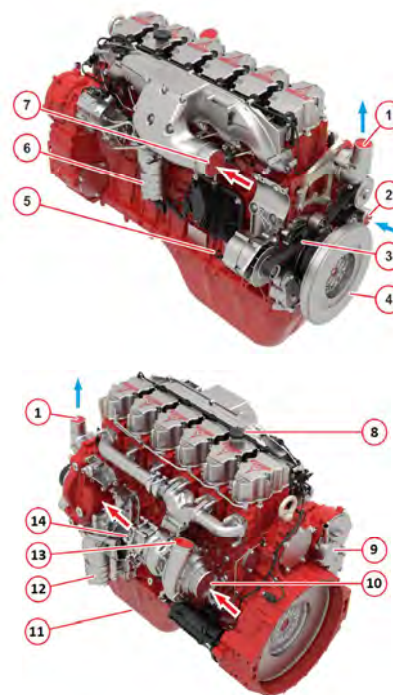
Engine structure: 1 – coolant outlet, 2 – coolant inlet, 3 – v-rib belt, 4 – torsional vibration damper, 5 – oil dipstick, 6 – fuel filter, 7 – boost air intake, 8 – oil inlet, 9 – engine block ventilation, 10 – air inlet, 11 – oil drain plug, 12 –lubricating oil filter, 13 –boost air outlet, 14 – exhaust [8]
